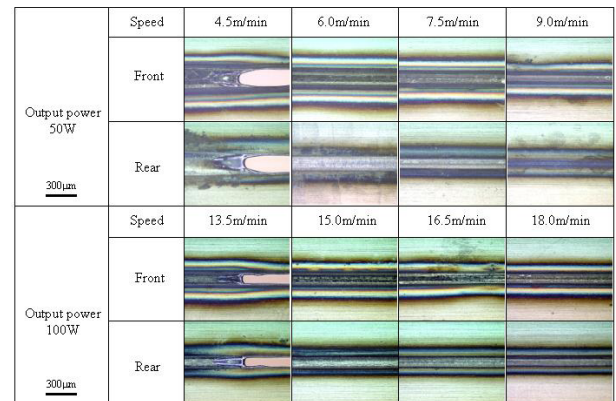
Microscope photographs of front and rear faces of weld beads of 50 μm foil.
